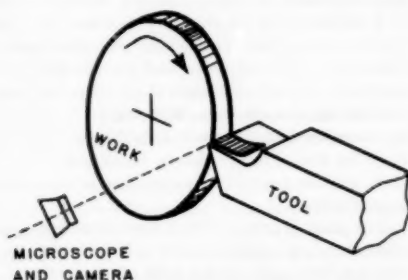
ARRANGEMENT OF TOOL, SPECIMEN, AND CAMERA FOR OBTAINING HIGH-SPEED PHOTOMICROGRAPHS WHILE CUTTING
